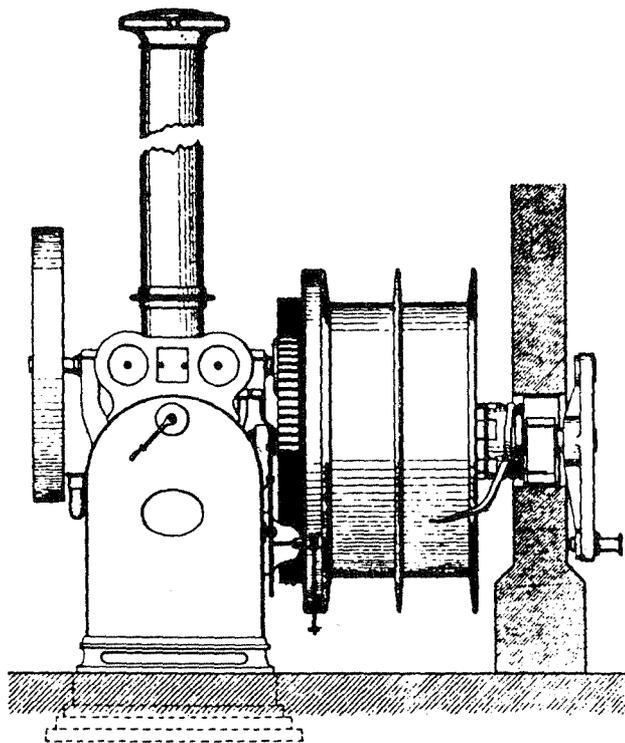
Portable engine driving a winding drum and pump crank. (Richardson, 1873:Plate 62).
